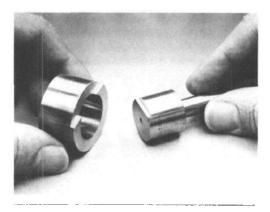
Ring and plug gauges for measuring dimensions of connectors according to ANSI specifications.
